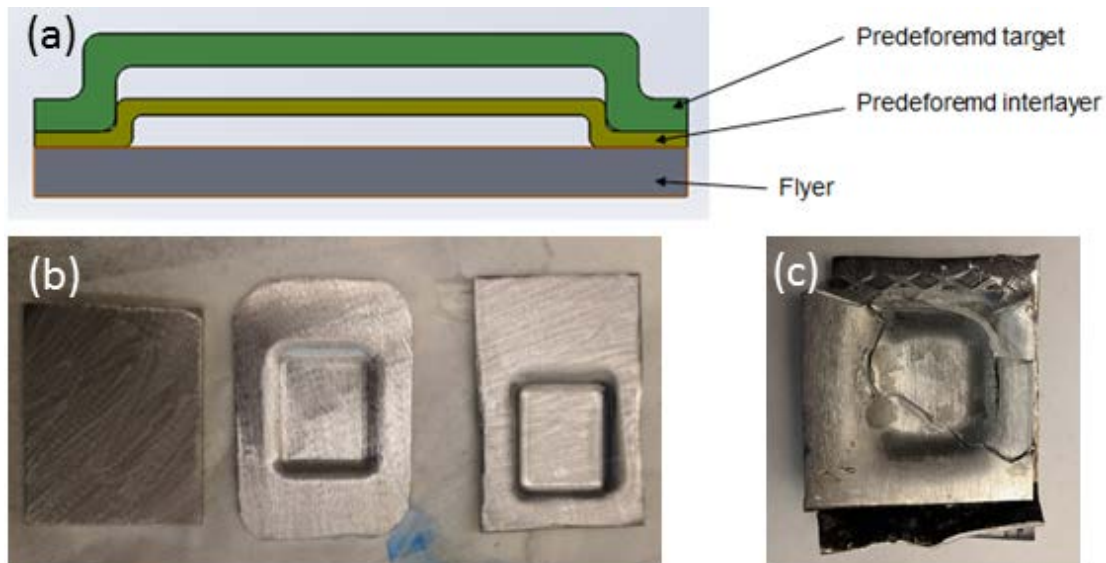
K.3. Stack up procedure of Type 2 samples: (a) schematic of welding set up; (b) the flyer (left), pre-deformed interlayer (middle), and pre-deformed target (right); and (c) pry-tested weld coupon showing failure in Aural 2. Source: OSU.
